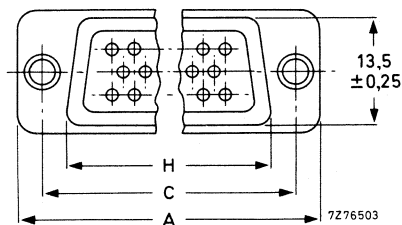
Terminal side of pin (or socket) connector; see also Table 5.
